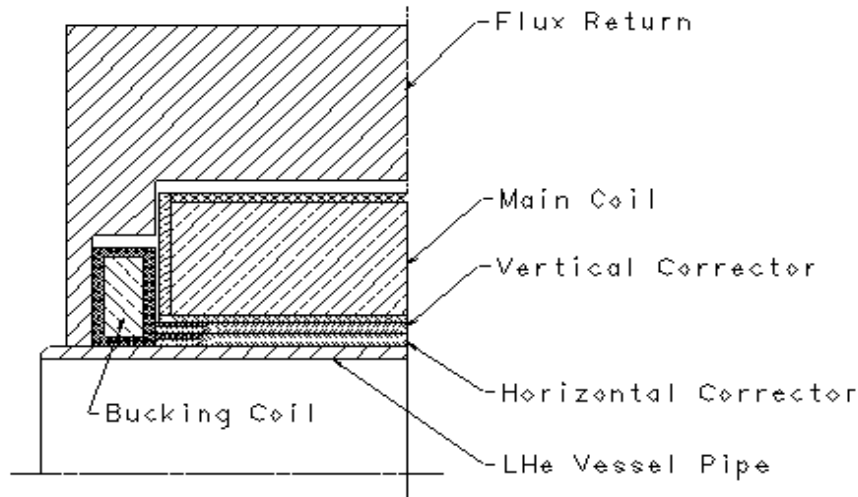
Modified design of a focusing solenoid with dipole correctors
